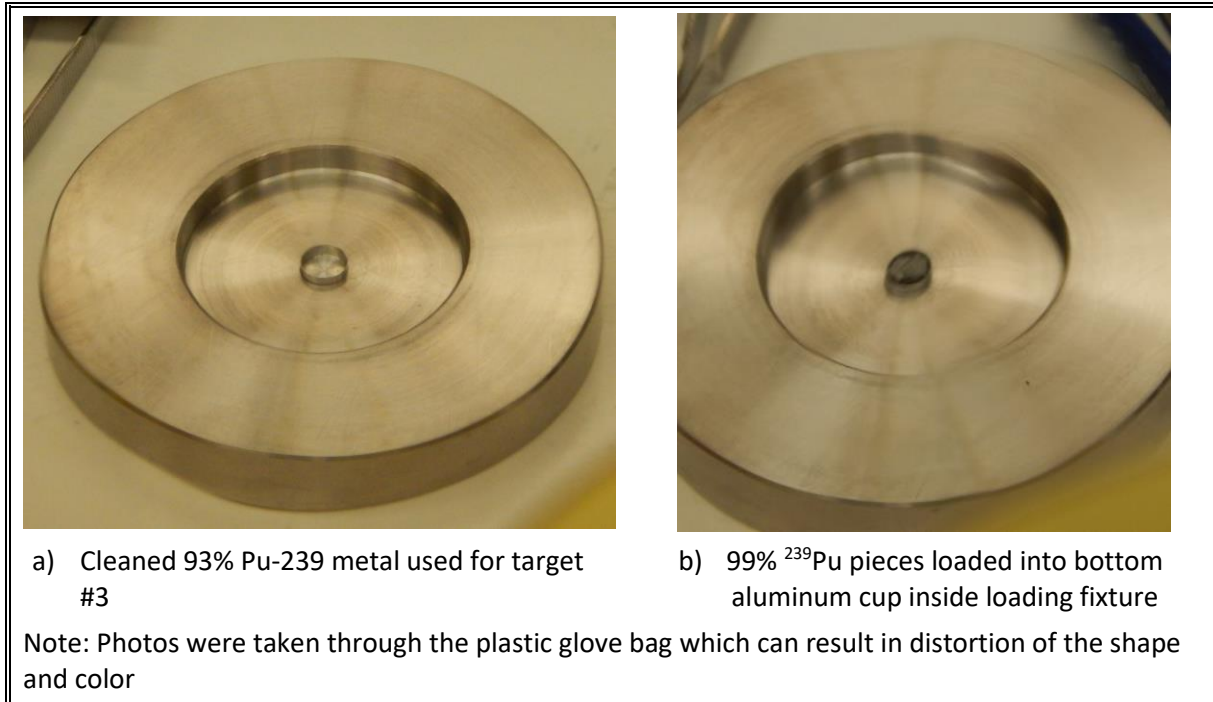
Fixture for loading Pu metal into the bottom Al cup
